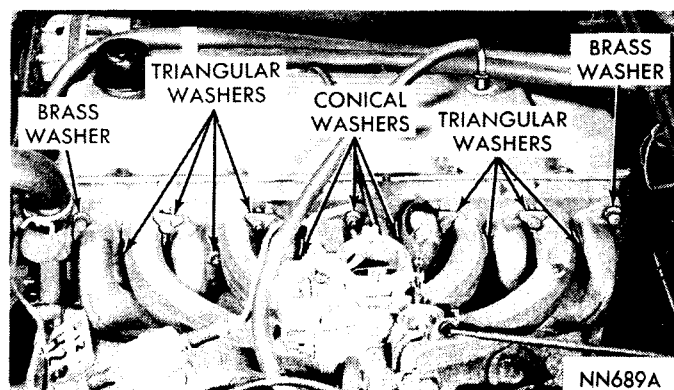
Installing Manifold Assembly (Six Cylinder Engines)
